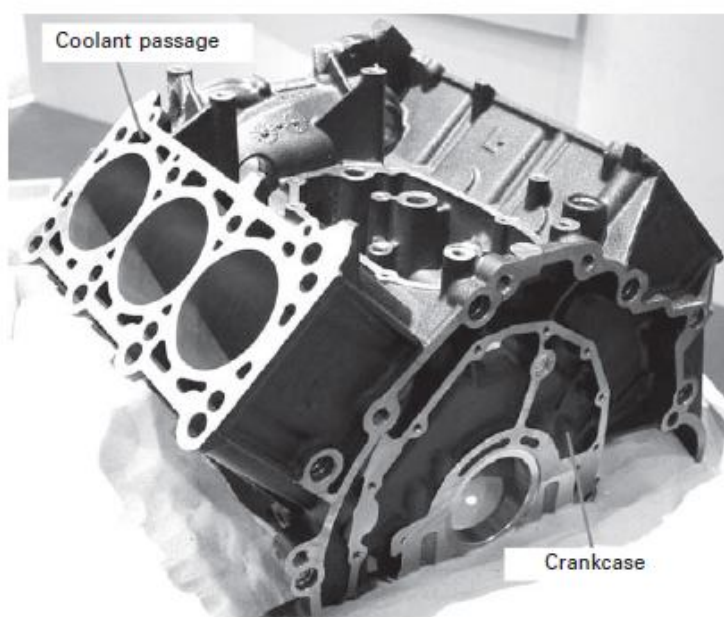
(b): A cast iron cylinder block integrated with the crankcase
